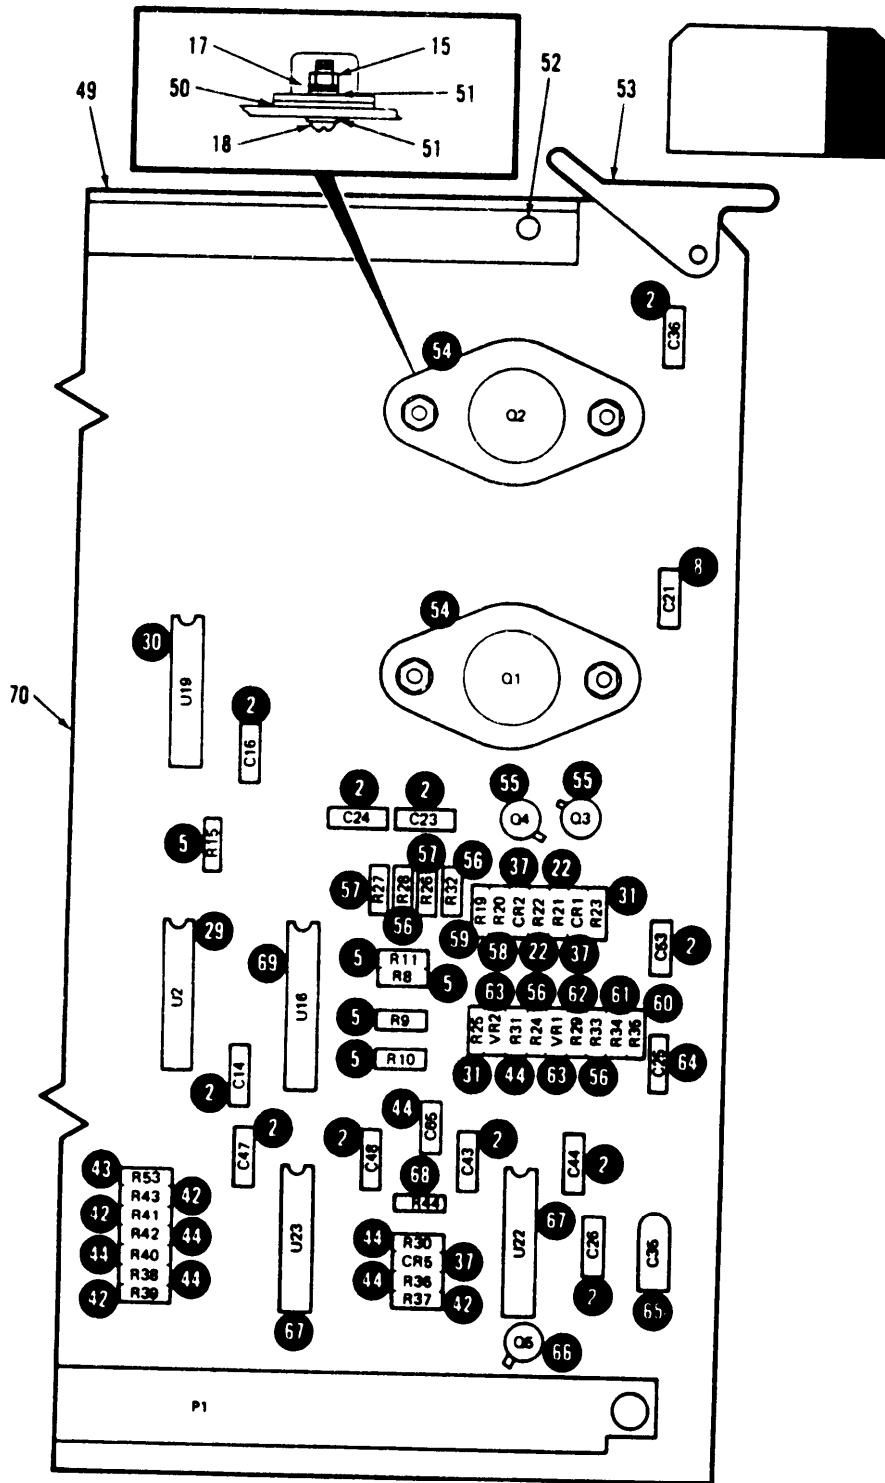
VIDEO DATA PROCESSOR CIRCUIT CARD ASSEMBLY
